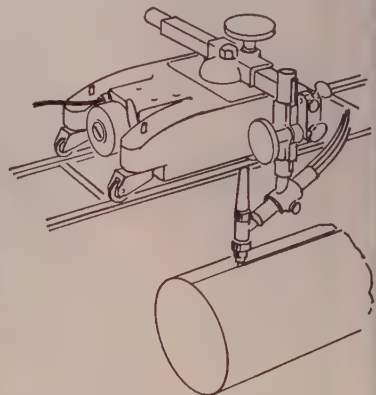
Do special welding jobs, such as tube fabrication, quickly with the CM-45. Rejects are reduced to a minimum.
